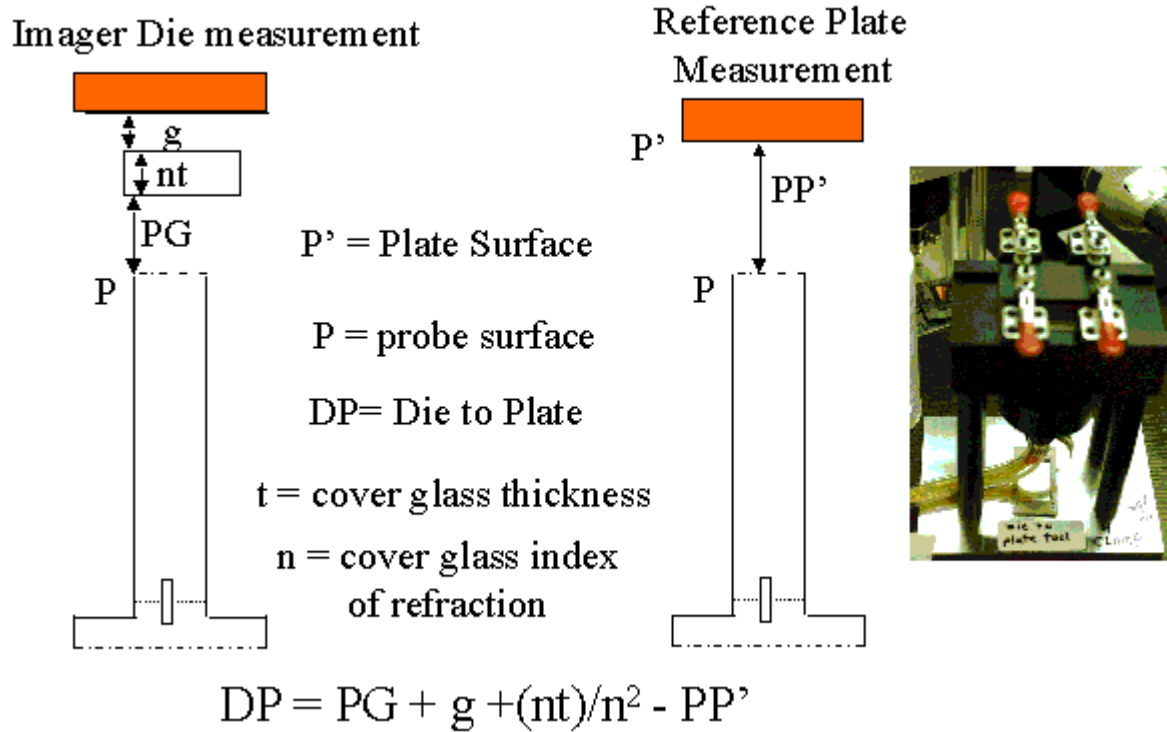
Die-to-plate measurement relationships (left) and test fixture (right)
